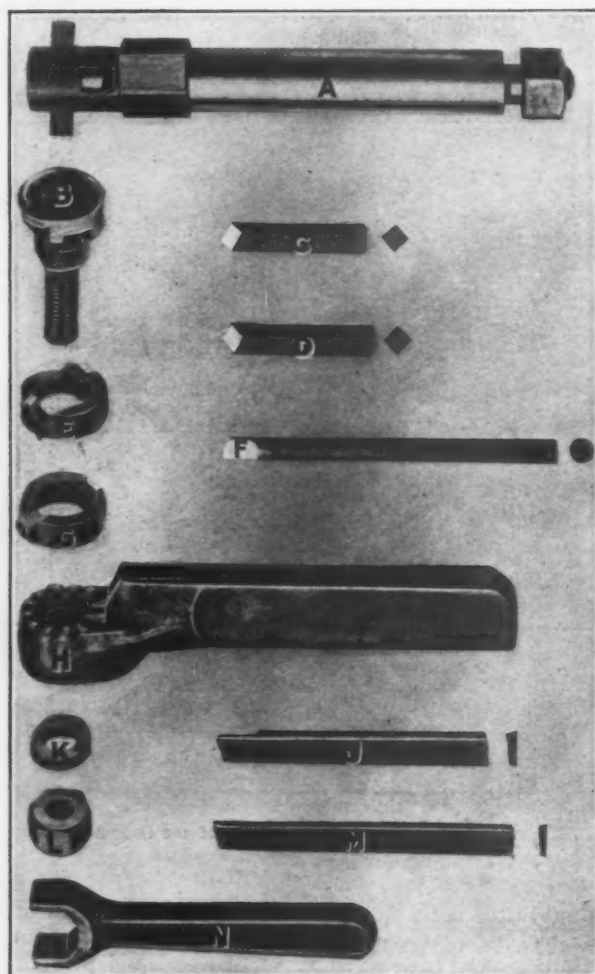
The Unassembled Parts of the Champion Combination Tool Holder Made by the Western Tool & Mfg. Company, Springfield, Ohio.
